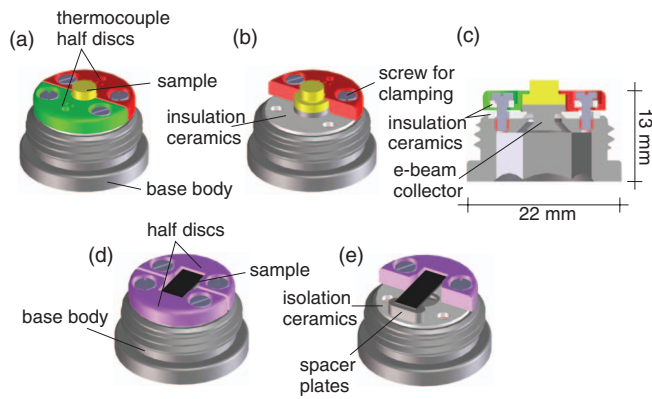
Sample holder. (a) Completely assembled sample holder for e-beam heating. The base of the sample holder is a body containing an outer thread fitting into the sample section. An e-beam collector and the sample are clamped to the base body by two half discs made of thermoelement material. (b) One half disc is removed. A sapphire plate is used to insulate the sample and e-beam collector from the base body. (c) Cross section through the sample holder. (d) Perspective view of the sample holder adapted for semi-conducting samples. The half discs fixing the sample to the base body are made of molybdenum. (e) Spacer platelets compensate for different wafer thickness.
